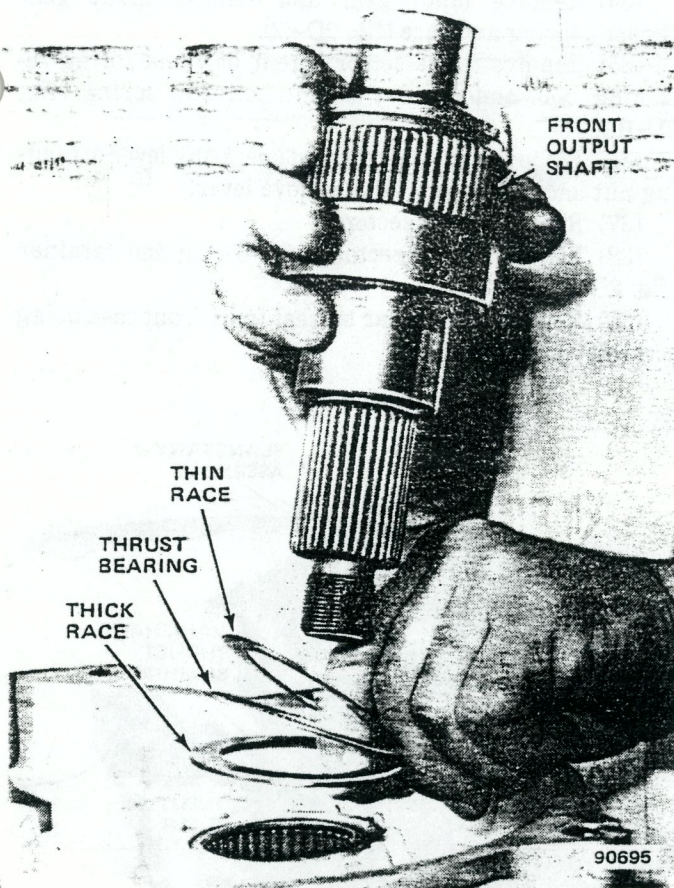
D-55 Front Output Shaft and Shaft Front Thrust Bearing Removal/Installation
